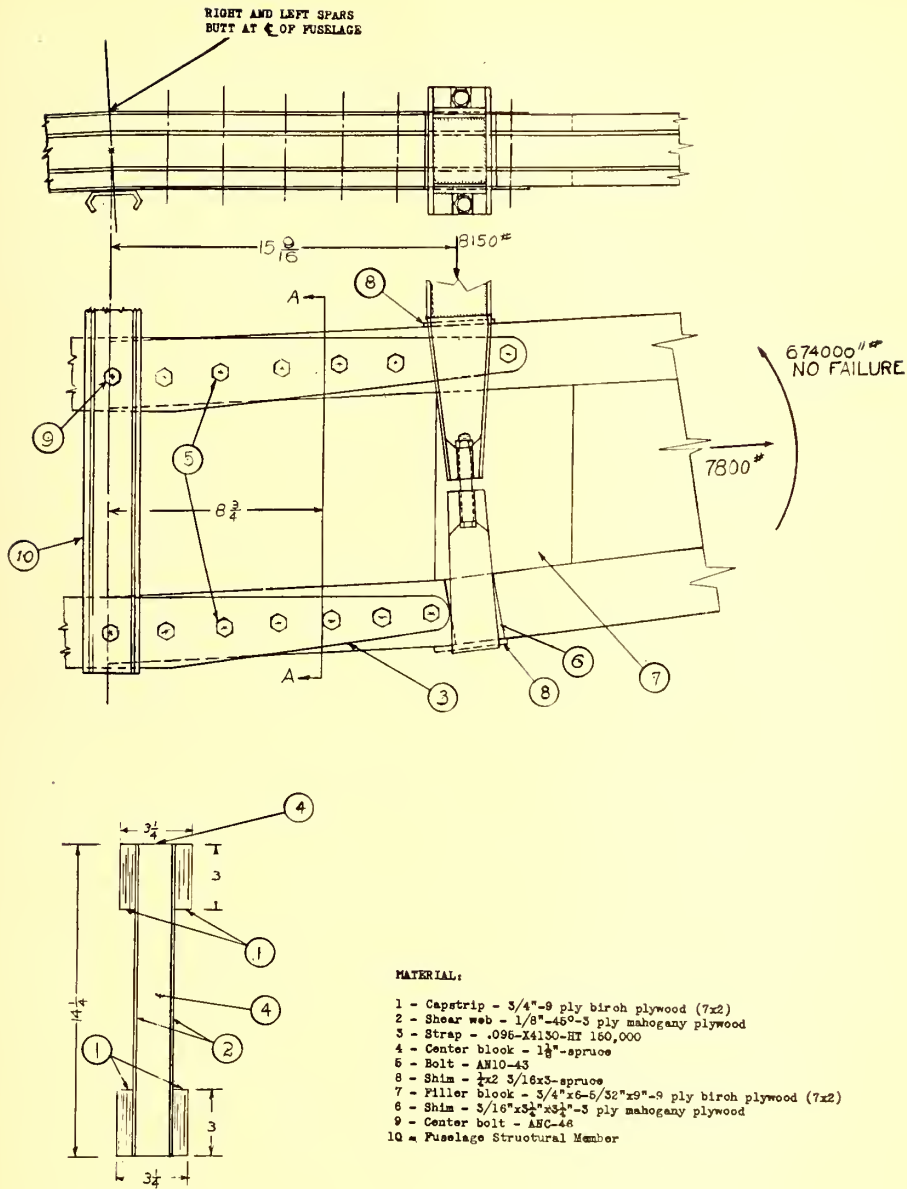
Spar Details at Root Section and Fuselage Attachment.
